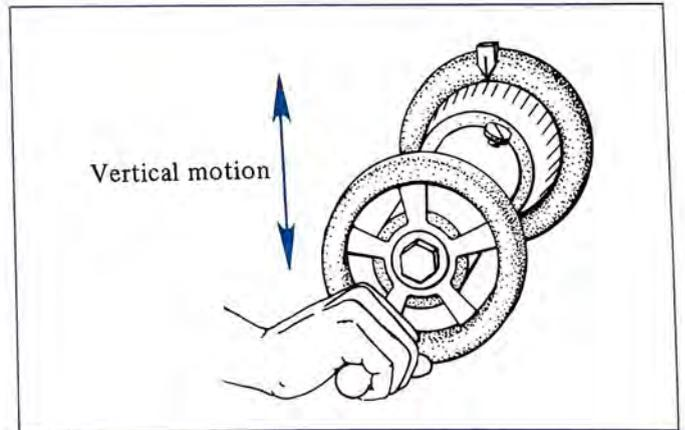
Changing Rotary to Linear Motion with a Screw Thread
